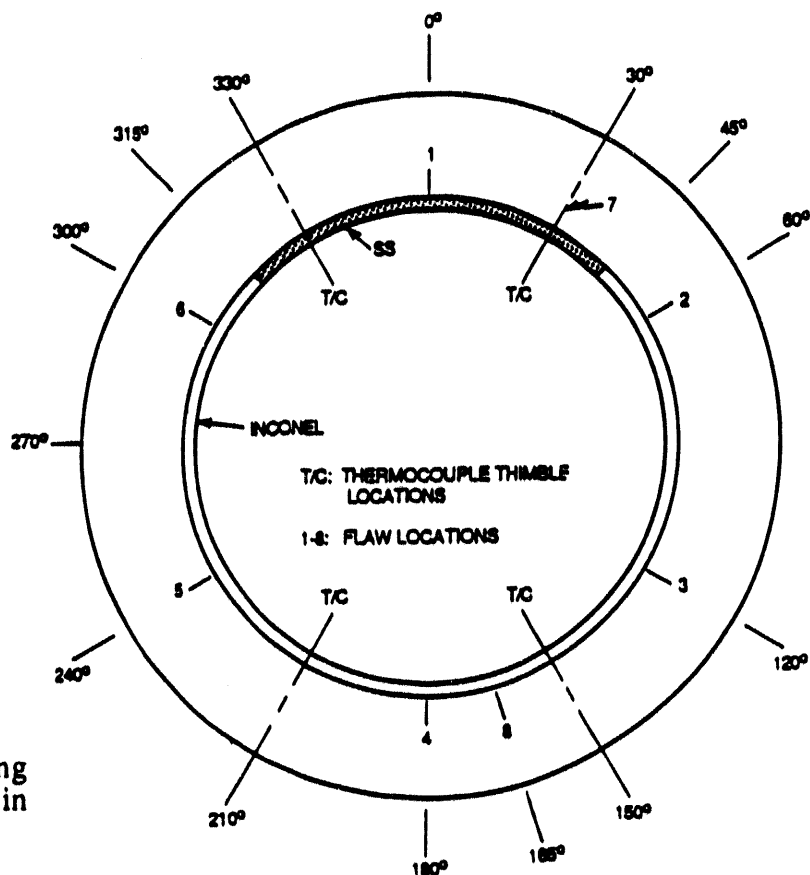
Cladding configuration and flaw locations in test cylinder for TSE-8, 9, 10, and 11.
